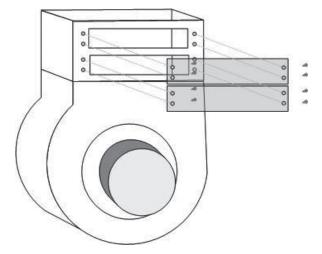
Showing Collar mounted on blower housing, element location and collar plate(s)
